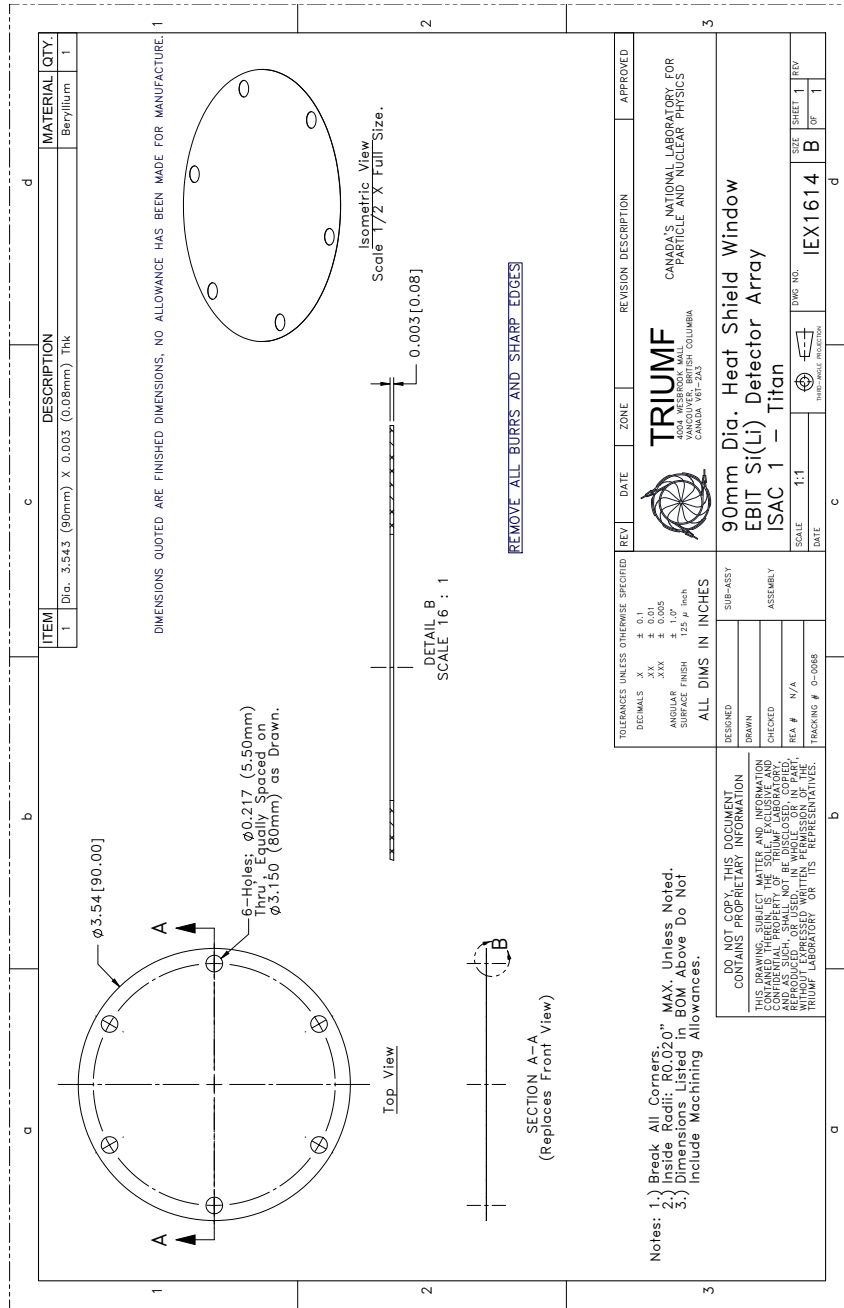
Technical drawing of the 90 mm diameter heat shield window [172].
